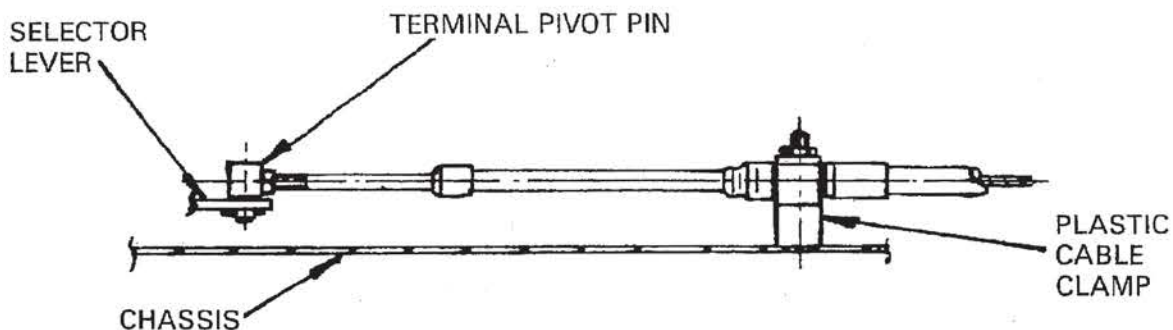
SELECTOR LEVER CABLE MOUNTING
